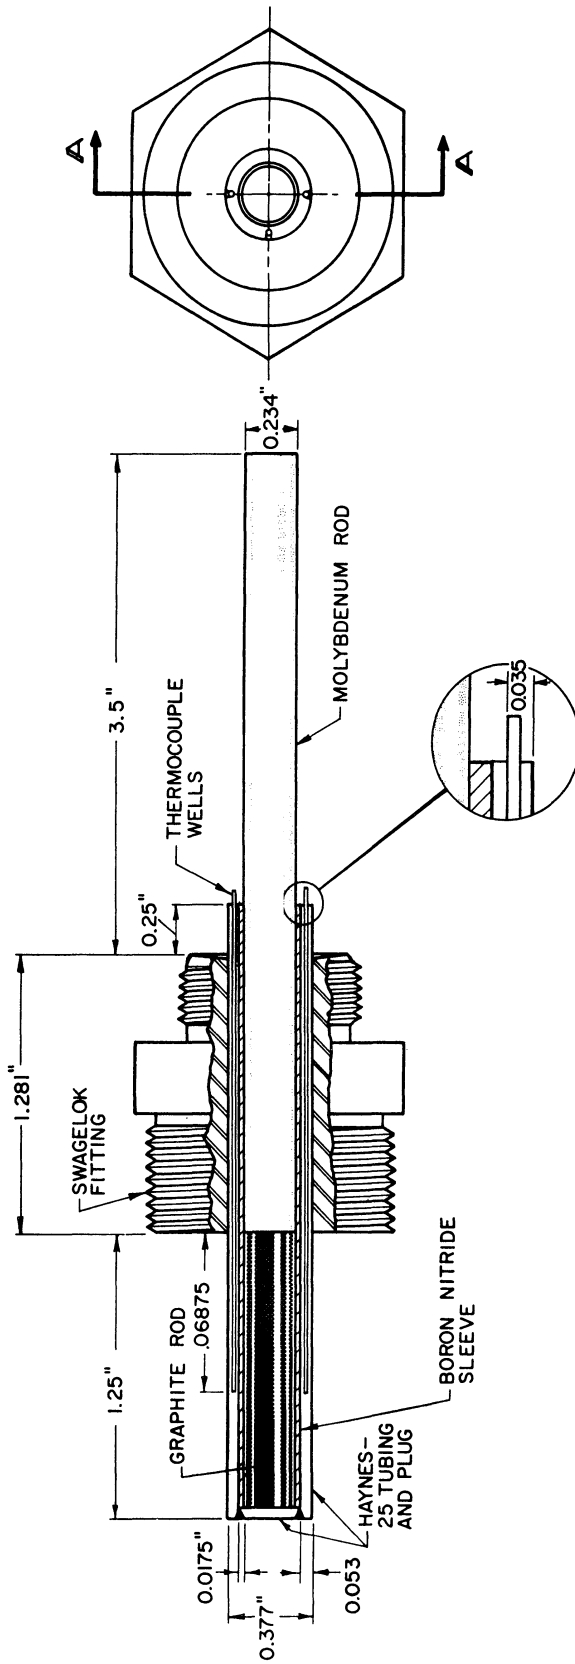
Cross Sectional Drawing of Boiling Tube Assembly.
